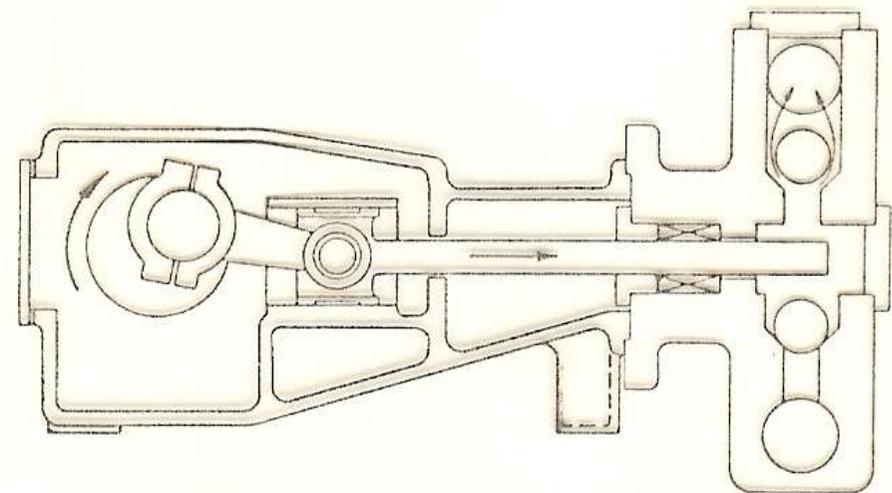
HORIZONTAL SINGLE-ACTING PLUNGER POWER PUMP
